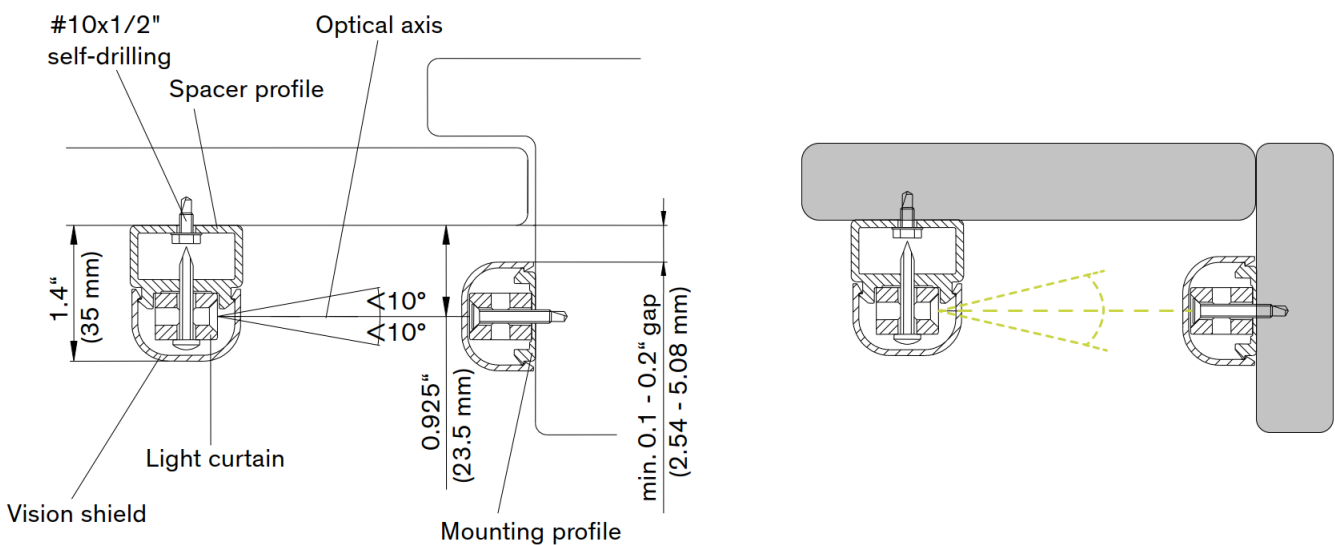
Mounting details of side opening doors with spacer and mounting profile
